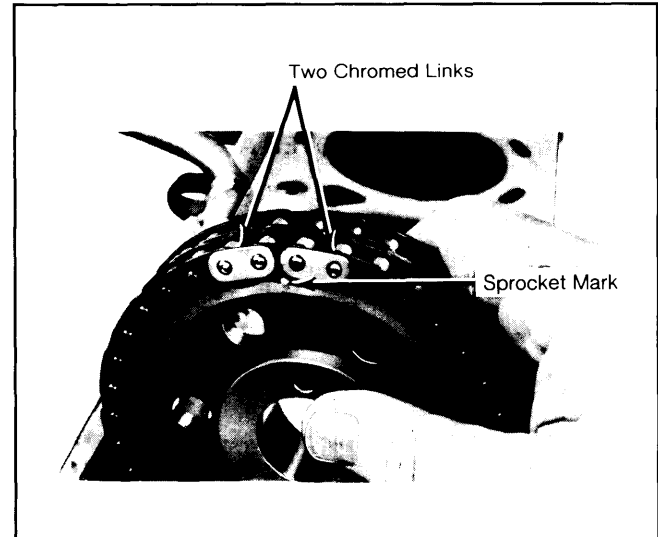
Aligning Crankshaft Sprocket and Timing Chain
